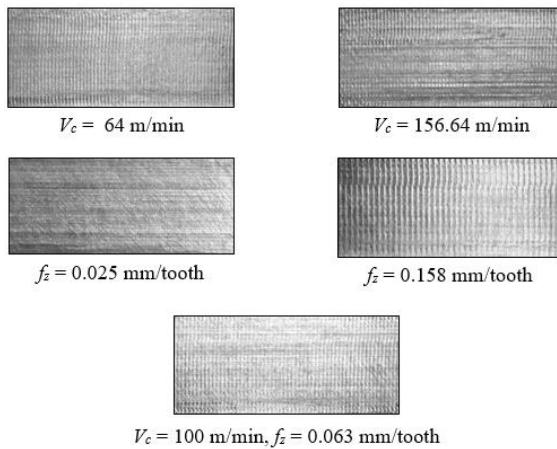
Surface photography of thin-walled workpiece Ti6Al4V on machining using coated carbide tools
